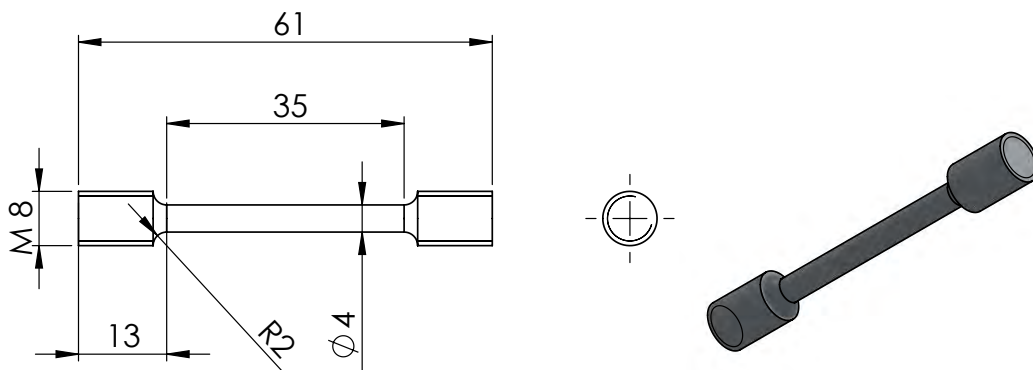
Geometry and dimensions of the hot tensile specimens
